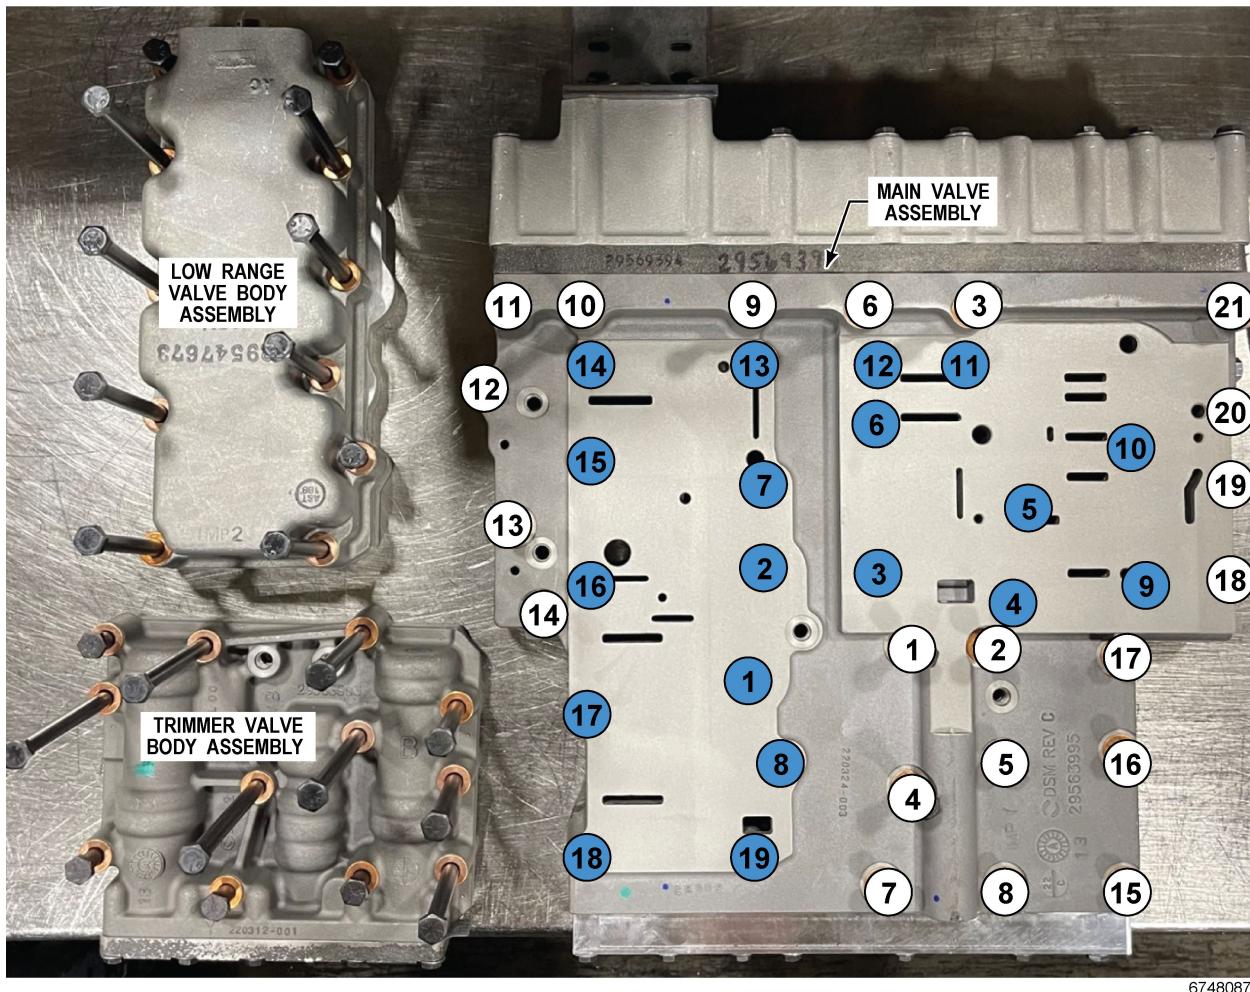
9000 Series Main Control Valve Body Assembly Torque Sequence
